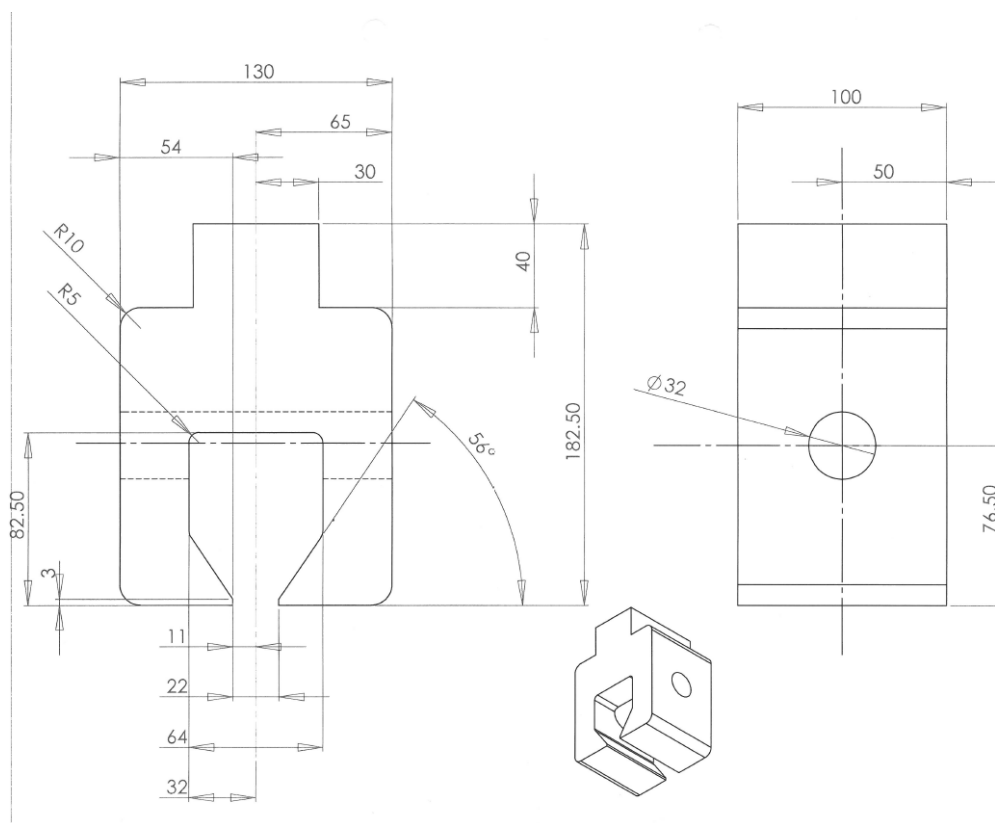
Design drawing of one of the grip fixtures for use with the dumbbells [17]. All dimensions in mm.
